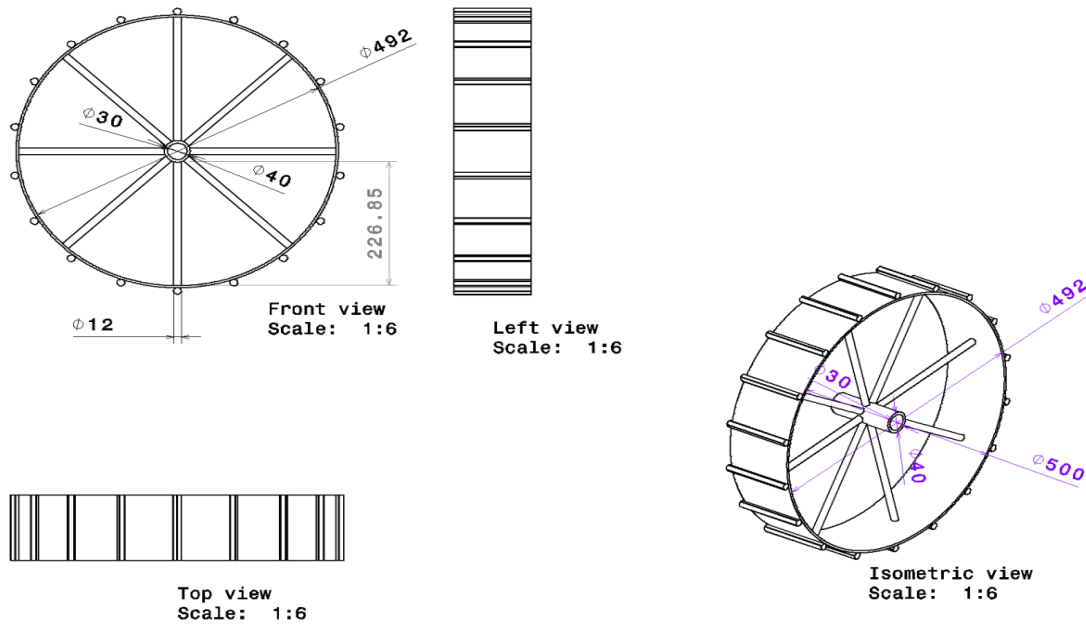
Details of drive wheel of 2WT operated wheat seeder (dimensions are in mm)
